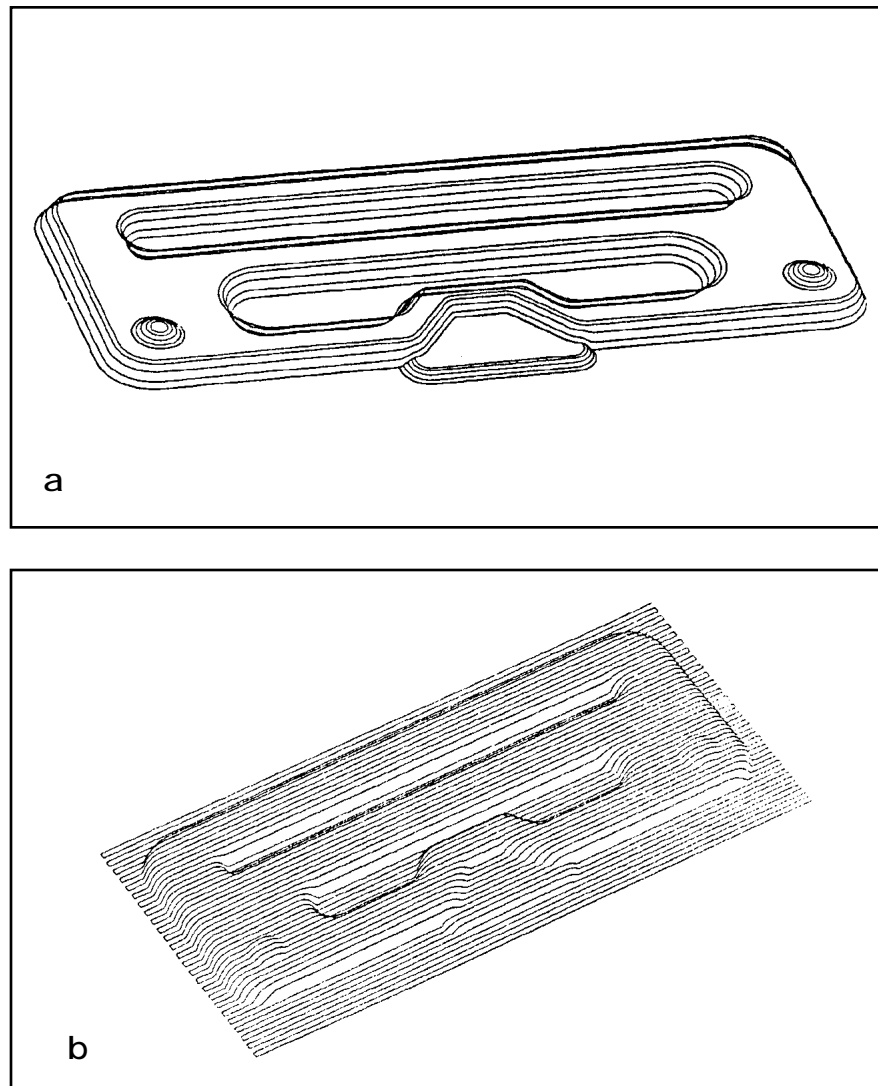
A Sample Sheet Metal Inner Panel Designed Using Innersurf. Above is the basic panel design shown with the features outlined in toolpaths keyed to the features. Below is a pattern of rectilinear NC toolpaths that will create the die surface. Source: [Cavendish and Marin].
